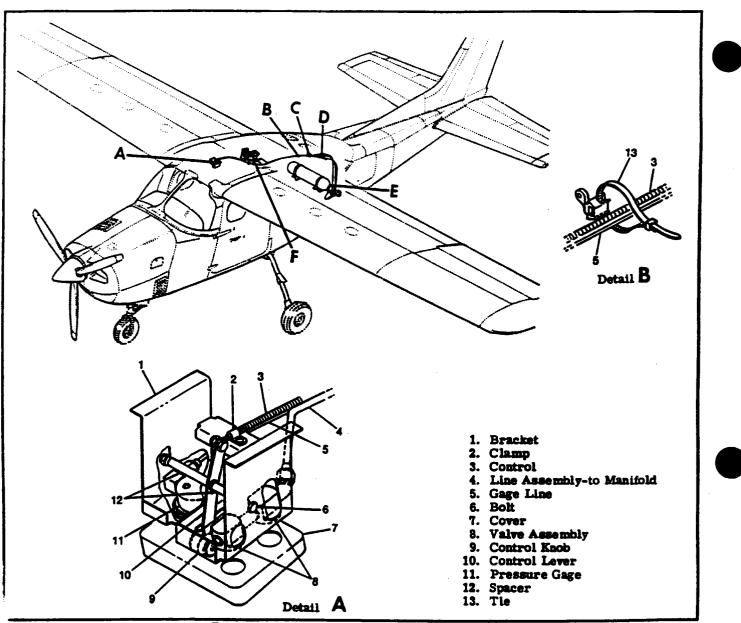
Oxygen Installation (Sheet 1 of 3)
